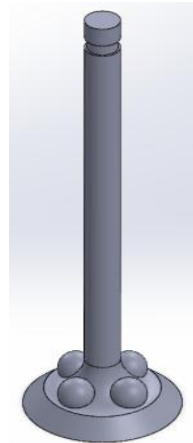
Modified Inlet poppet valve (4-Ball valve)
